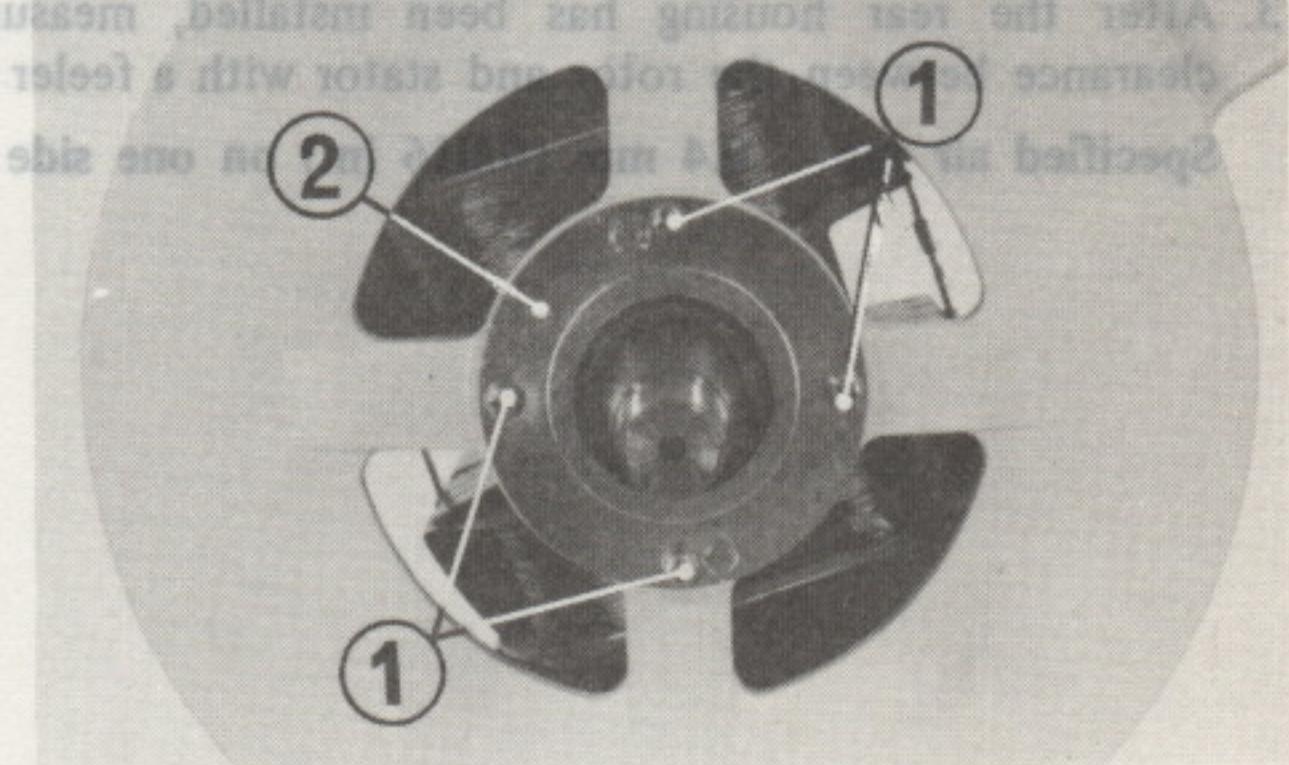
(1) 4 mm screw (2) Bearing cover
